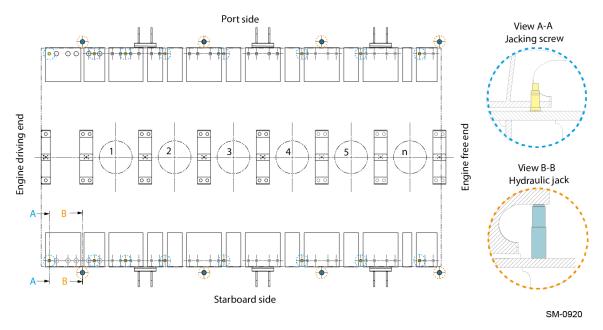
Engine alignment by jacking screws with hydraulic jacks
